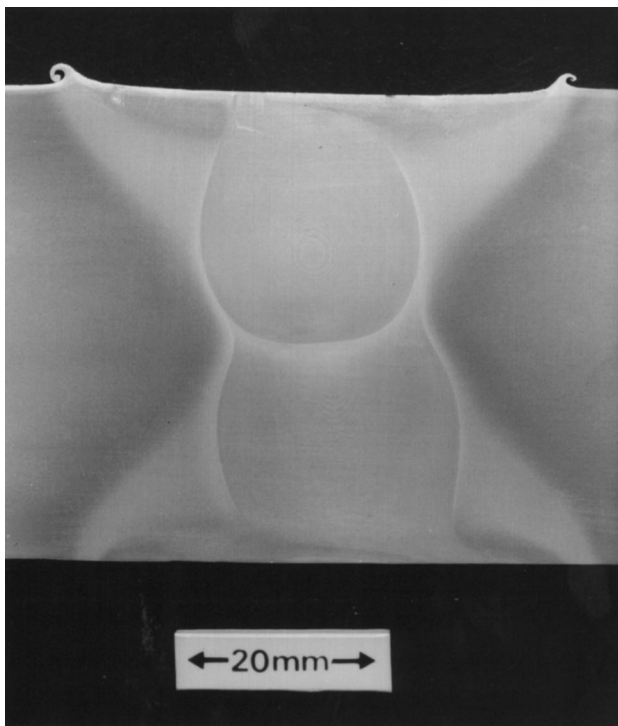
Transverse macrosection of 50 mm thick 6082 T6 aluminium alloy. Plate material welded from both sides, showing weld nugget profile and flow contours
